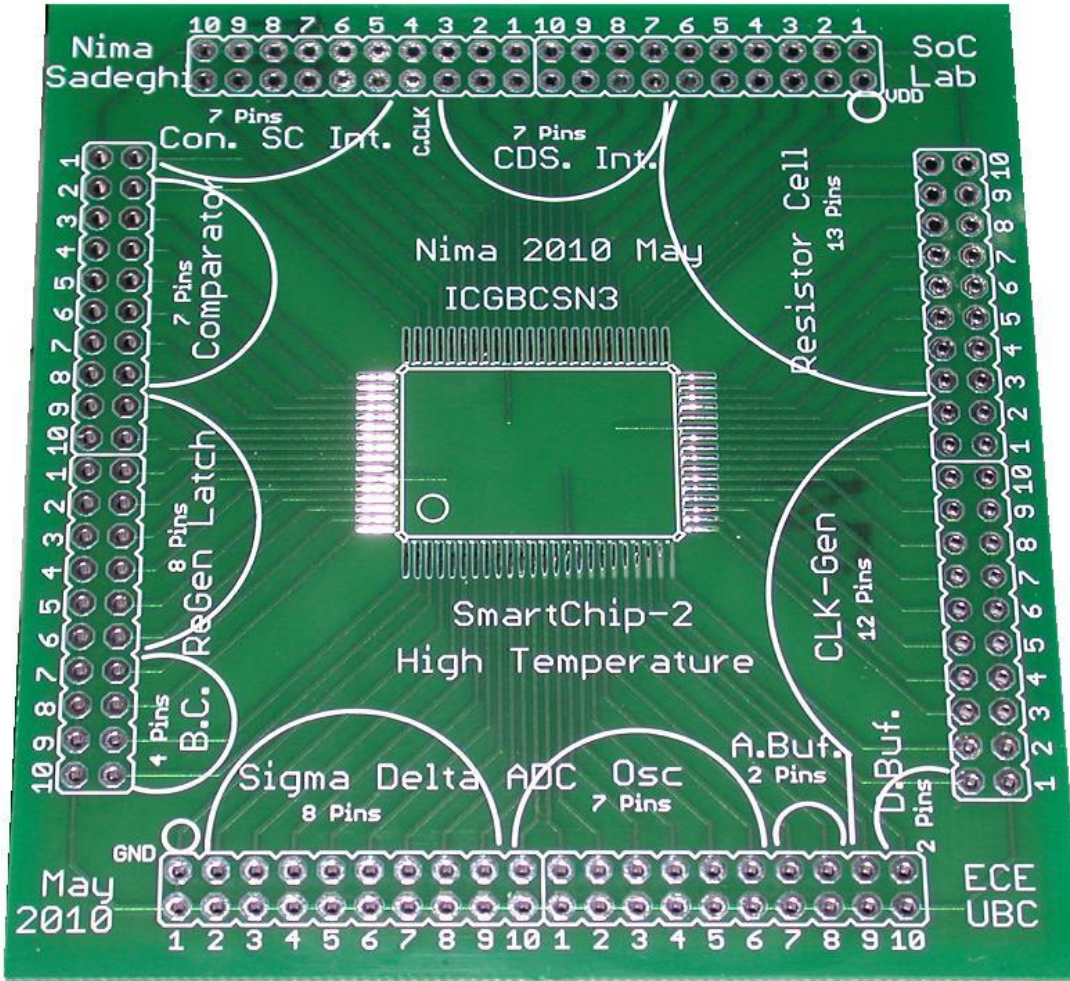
Solder coat.* Solder (tin/lead) is applied to the exposed copper areas, and the excess solder is removed.
